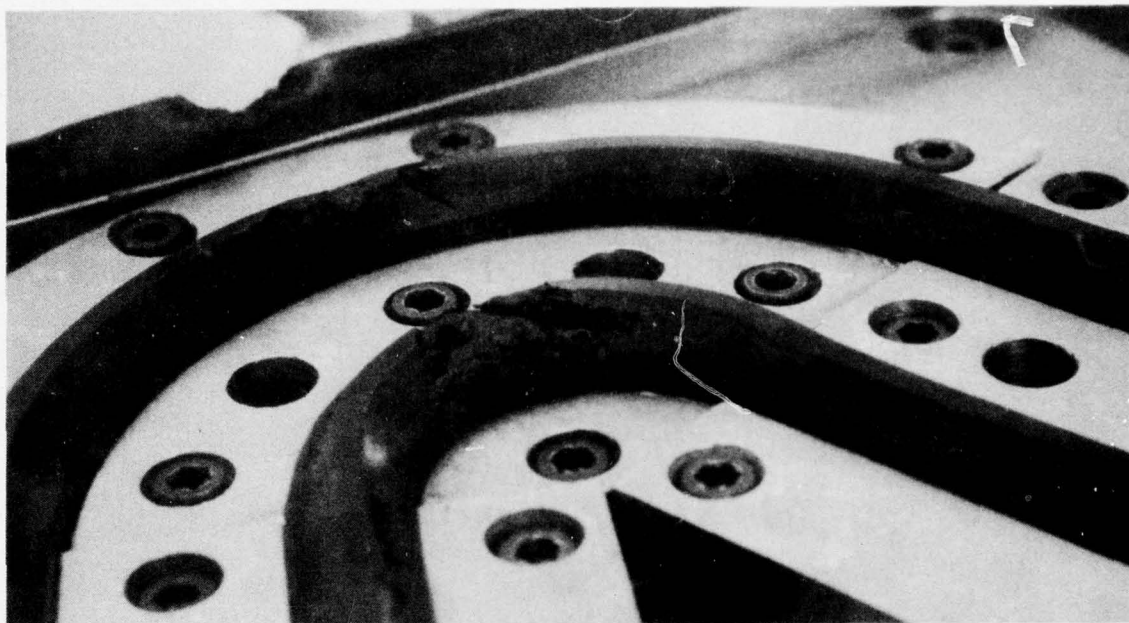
Sliding Seal Set No. 9 - Wear Caused by Long Butt Welding on Titanium Plate
